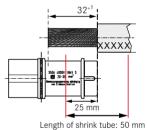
Shrink tube assembly over the cable and contact for Han® HC Modular 350
